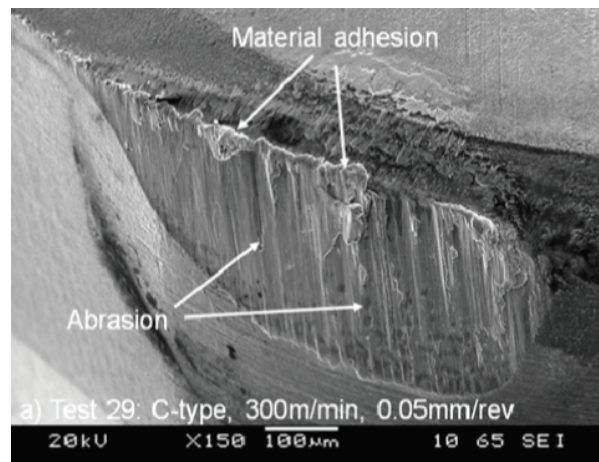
Illustration of abrasion mechanism on the tool flank face in orthogonal cutting of Inconel 718 using PCBN inserts at  $V_c = 300$  m/min,  $f = 0.05$  mm/rev (Khan et al., 2012).
